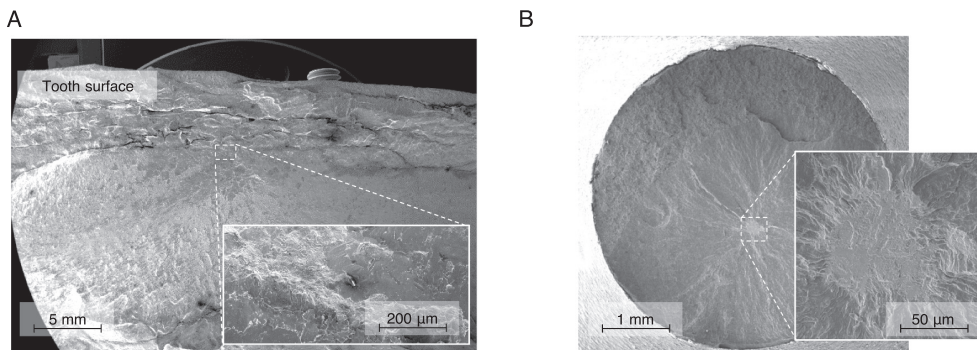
TFF on wheel B3-2 with (A) fracture surface and a close-up of assumed initiation site compared against (B) crack initiation from large, retained austenite grain [4] in 34CrNiMo6 VHCF uniaxial fatigue specimen.
